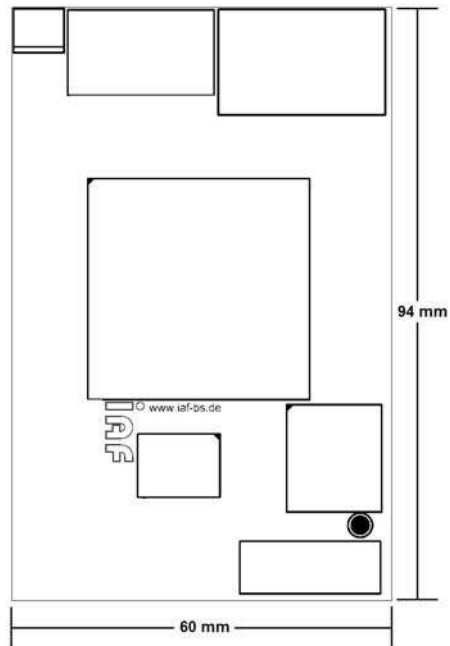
Board-Dimensions of Virtex5 SX95 Board
